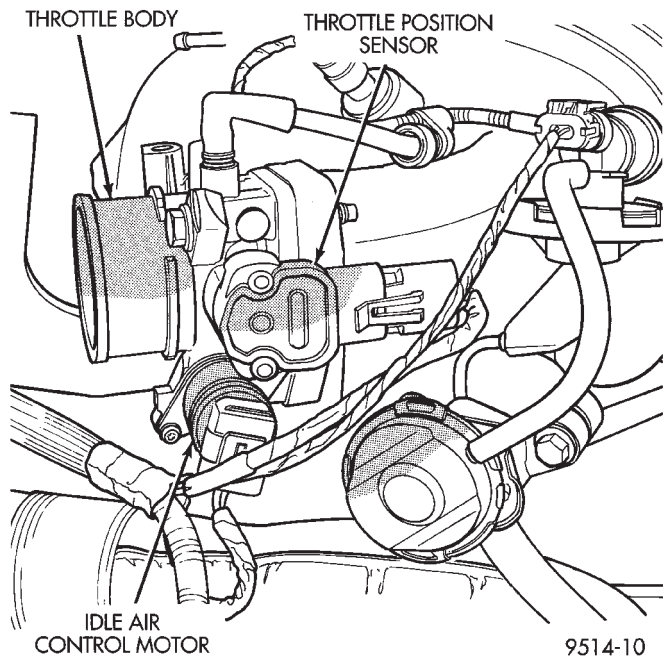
Electrical and Vacuum Connection to Throttle Body
